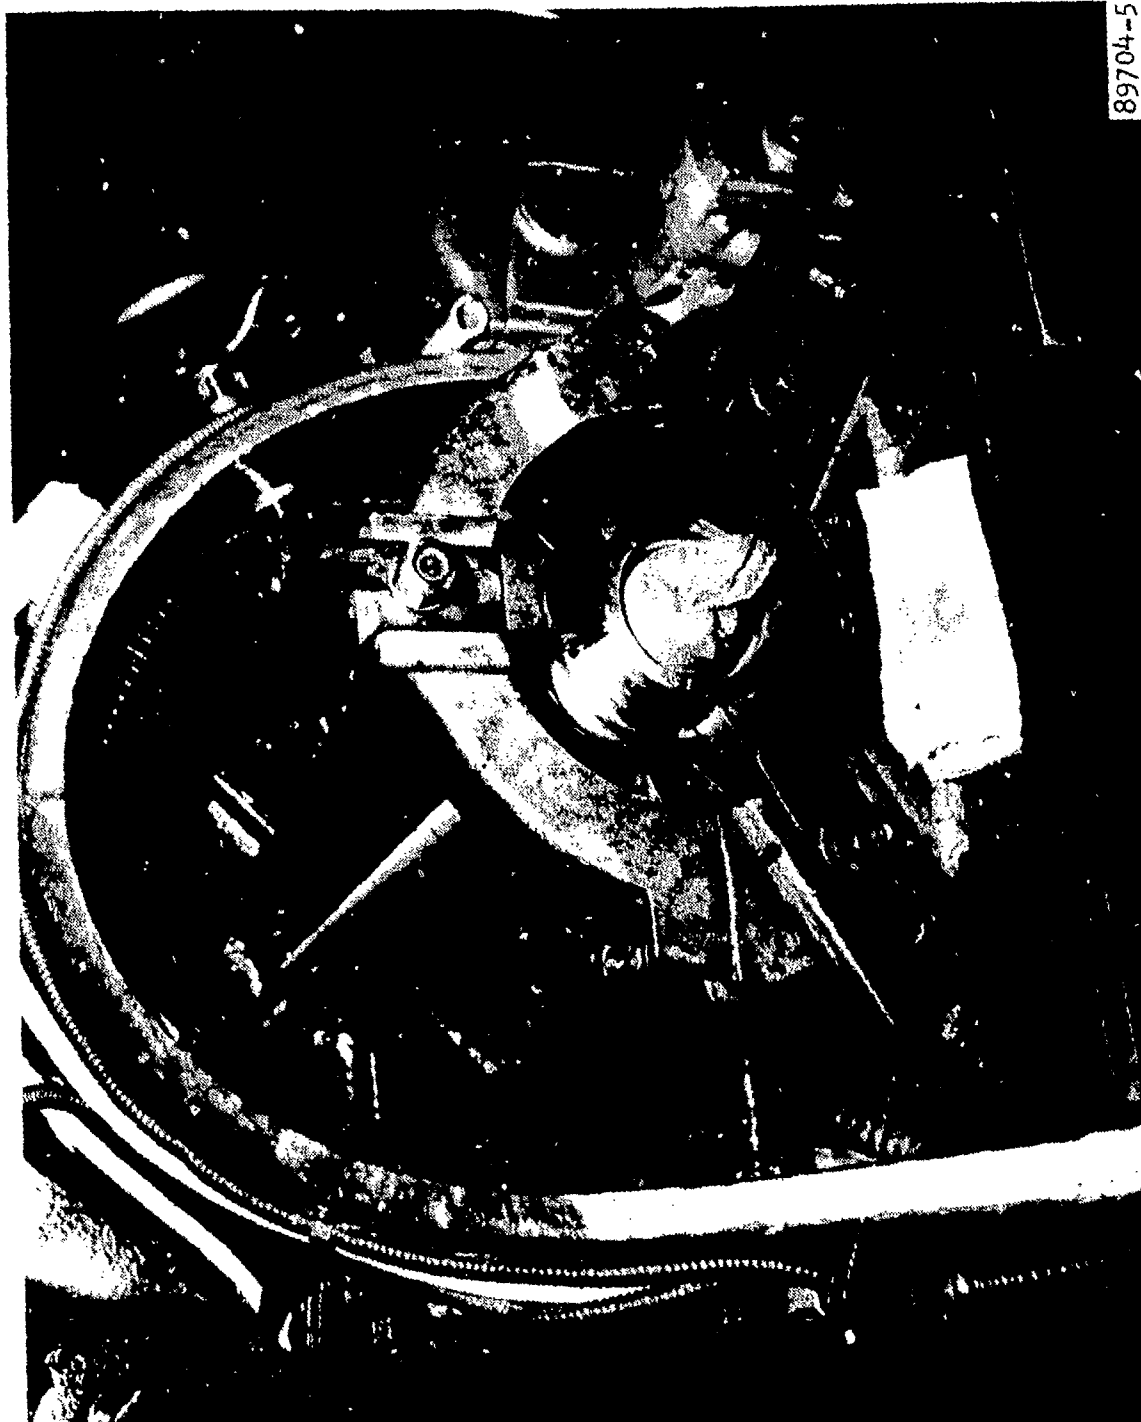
Rotor-Holding Fixture Opposite Spline End
